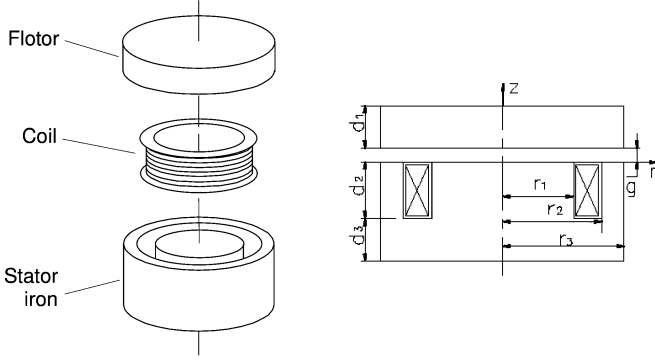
Exploded view and cross section of a nonlaminated electromagnetic actuator.
